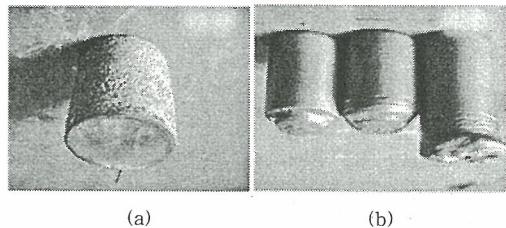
Cu ingot casting experiment in the engineering scale of ingot casting equipment; (a)Cu chip ingot, (b)Cu powder ingot.
